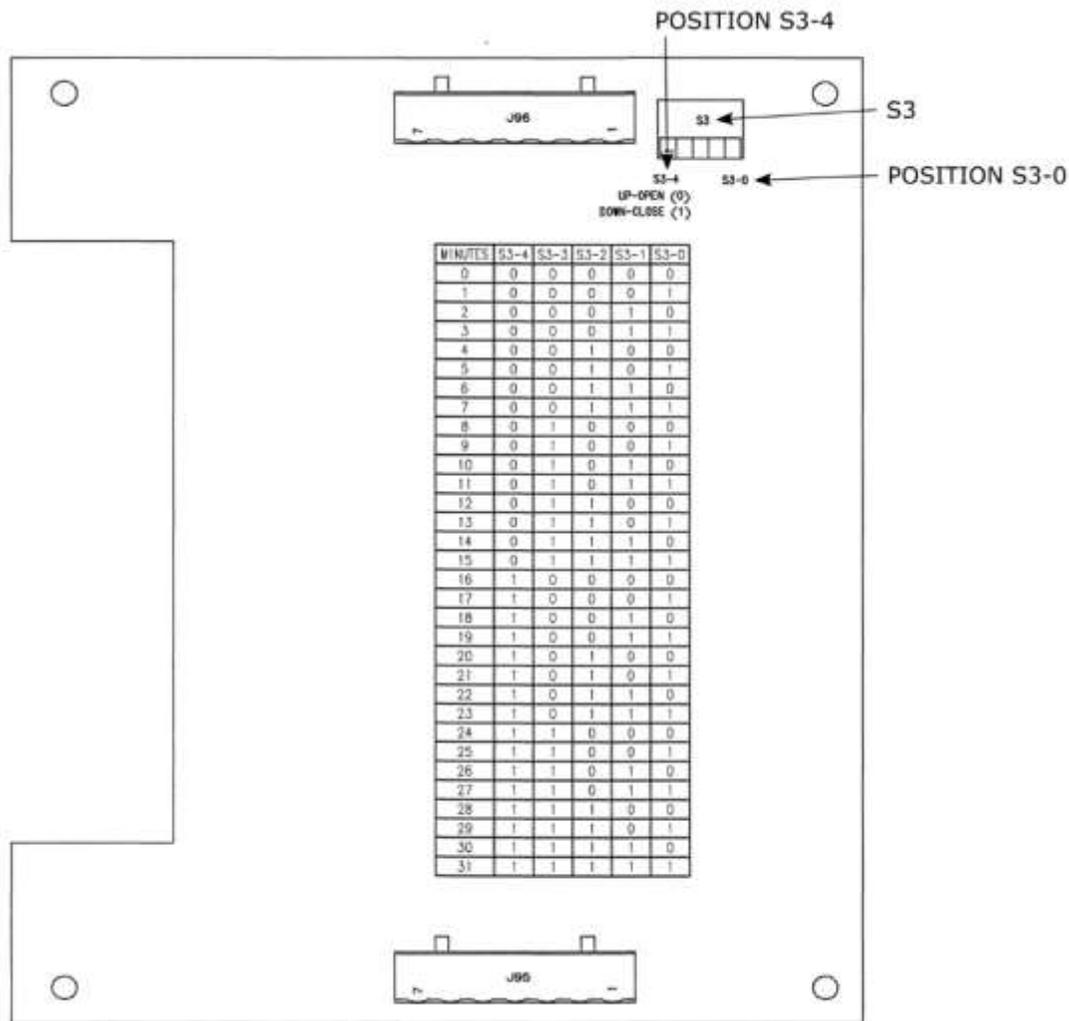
Transfer Module Assembly, A80468, S3 Switch Position
